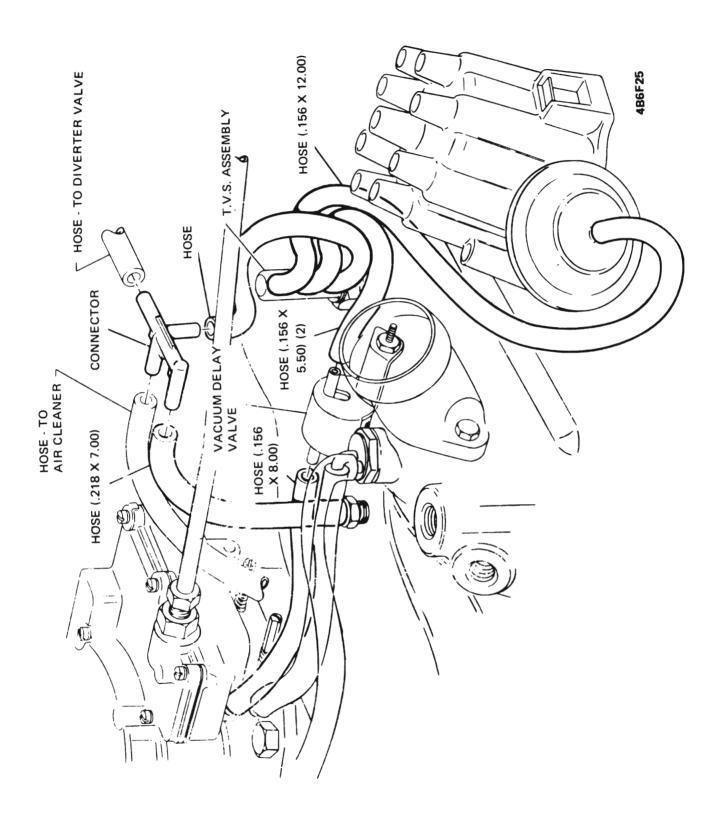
F-25 A-B Series Vacuum Hose Routing (All 455-2 Bbl. Engines)
